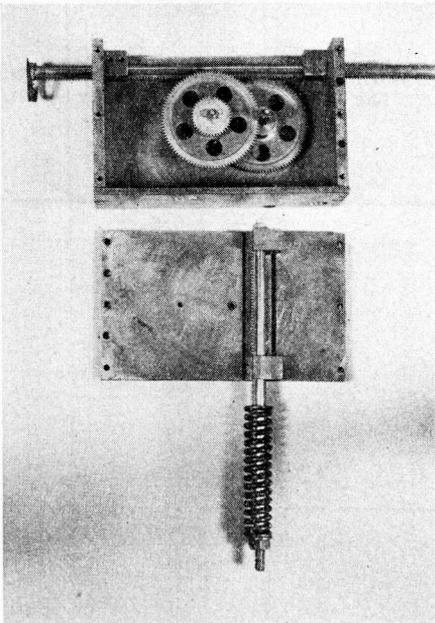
Showing Working Parts of 25 to 1 Ratio of Gear Train Mechanism
